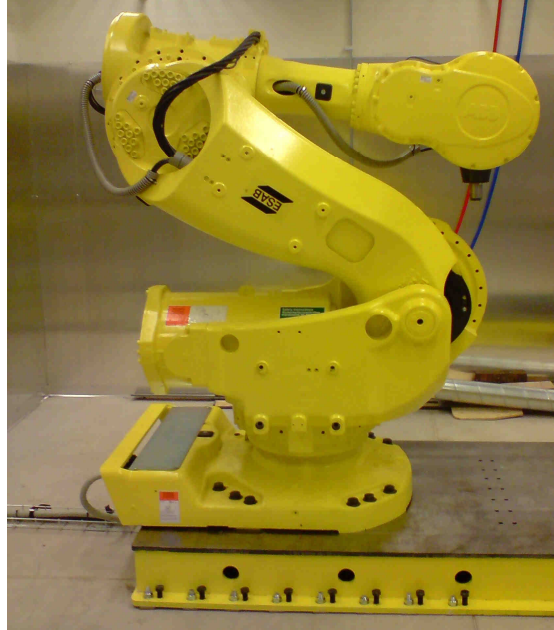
ESAB Rosio™ Friction Stir Welding Robot.
